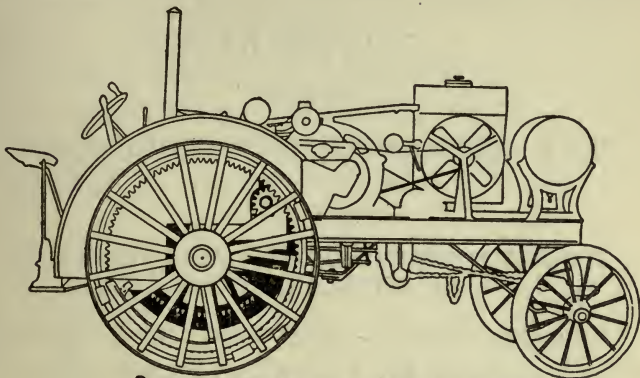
A.—HOW THE INTERNAL BULL GEAR DRIVE IS MADE AND WORKS
